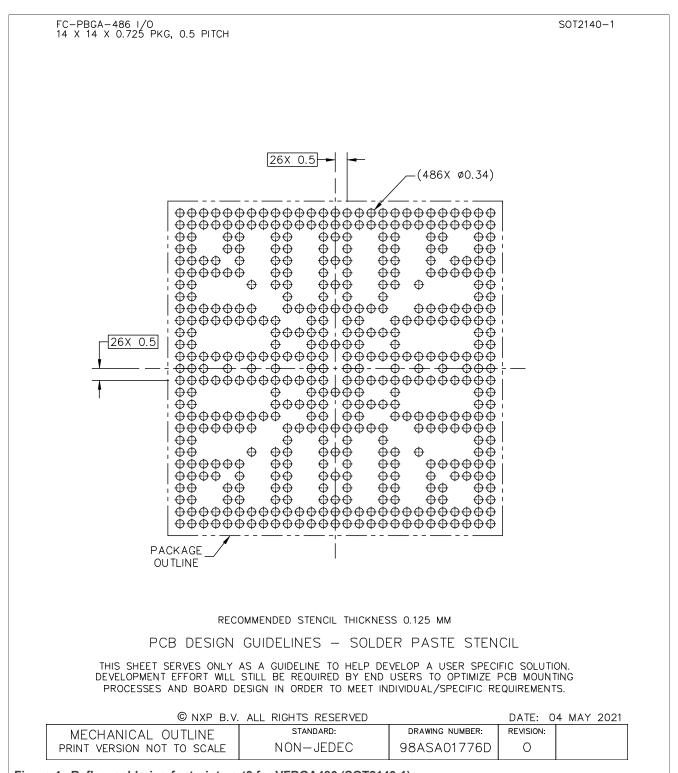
Reflow soldering footprint part3 for VFBGA486 (SOT2140-1)
